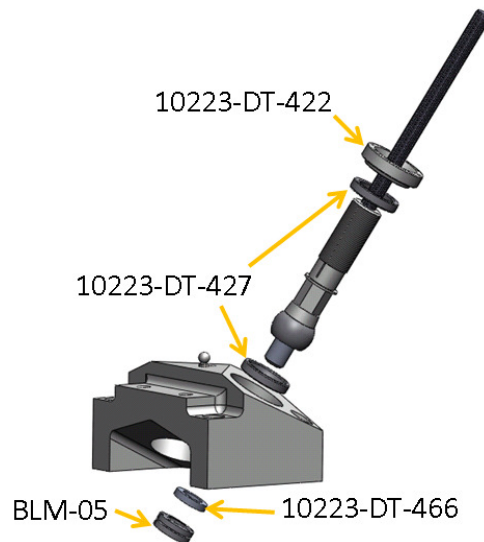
The strut-end assembly components are added on. 10223-DT-422 threads into 10223-DT-015 to capture the H-COM 19 ball between its split race. The spacer and BLM-05 go on the backside [24].
